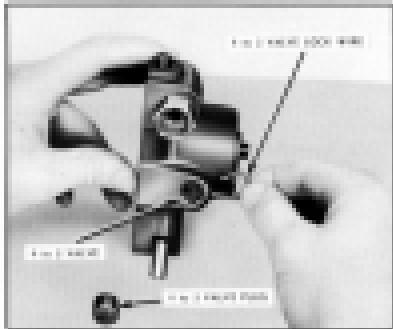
Removing 4 in 3 Valve Lock Wire.
